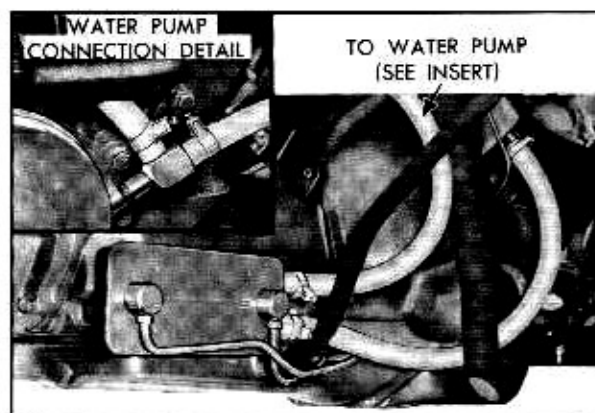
Oil Cooler Hose and Pipe Connections
